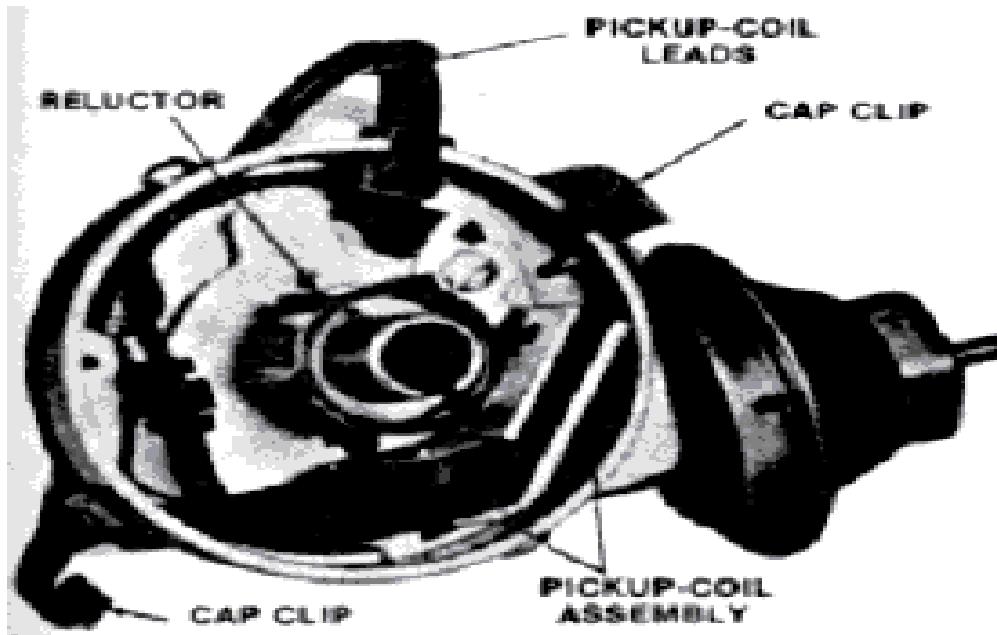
Top View of the Chrysler Electronic Ignition Distributor. The Cap And Rotor Have Been Removed To Show The Reluctor And The Pick-Up Coil.
